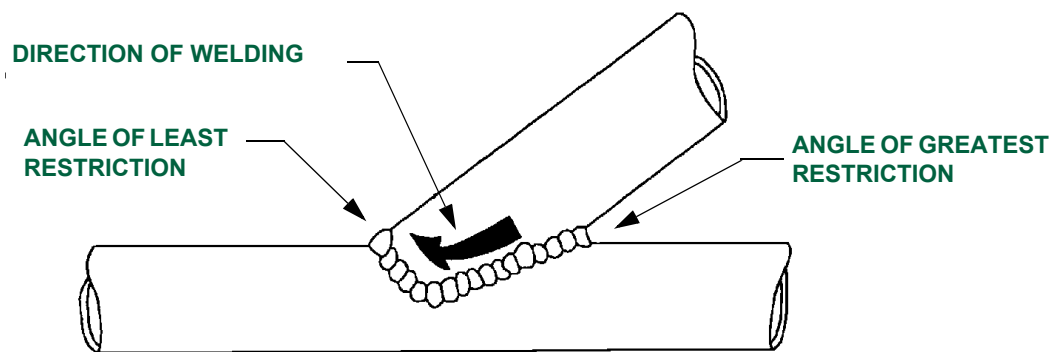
WELDING AT TUBE INTERSECTIONS
